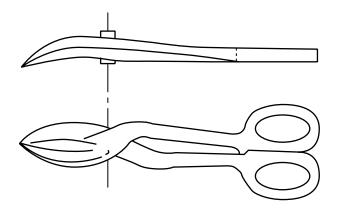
TYPE I TINNER, CLASS 2 CIRCULAR CUT, STYLE A HEAVY DUTY AND STYLE B MEDIUM DUTY
